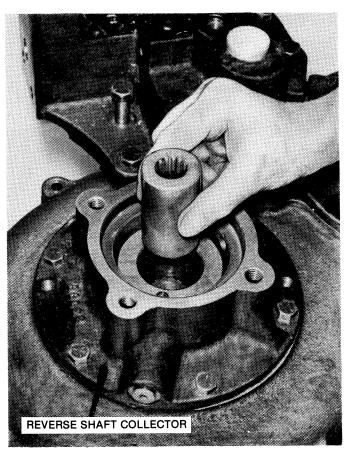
Removing or Installing Pump Drive Coupling Assembly.
